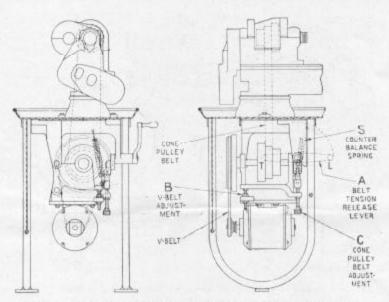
Setting the drive to get the proper belt measurement on the 10" Bench Underneath Drive.
